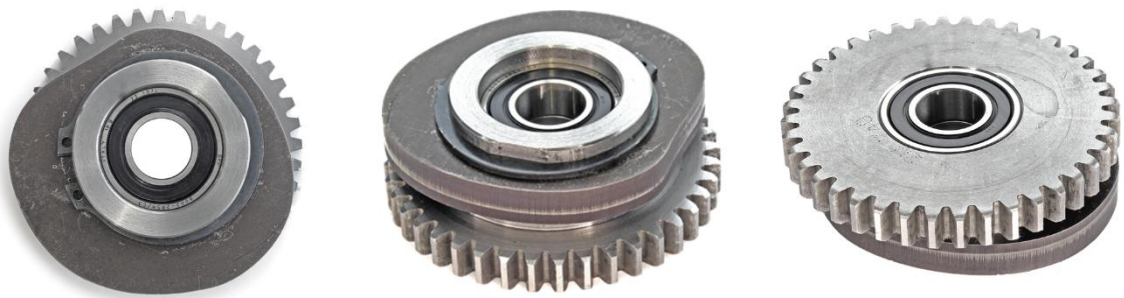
40-tooth gear with mounted cam, featuring a keyway and retaining ring, along with two internal bearings to mount on the mechanism structure shaft.
